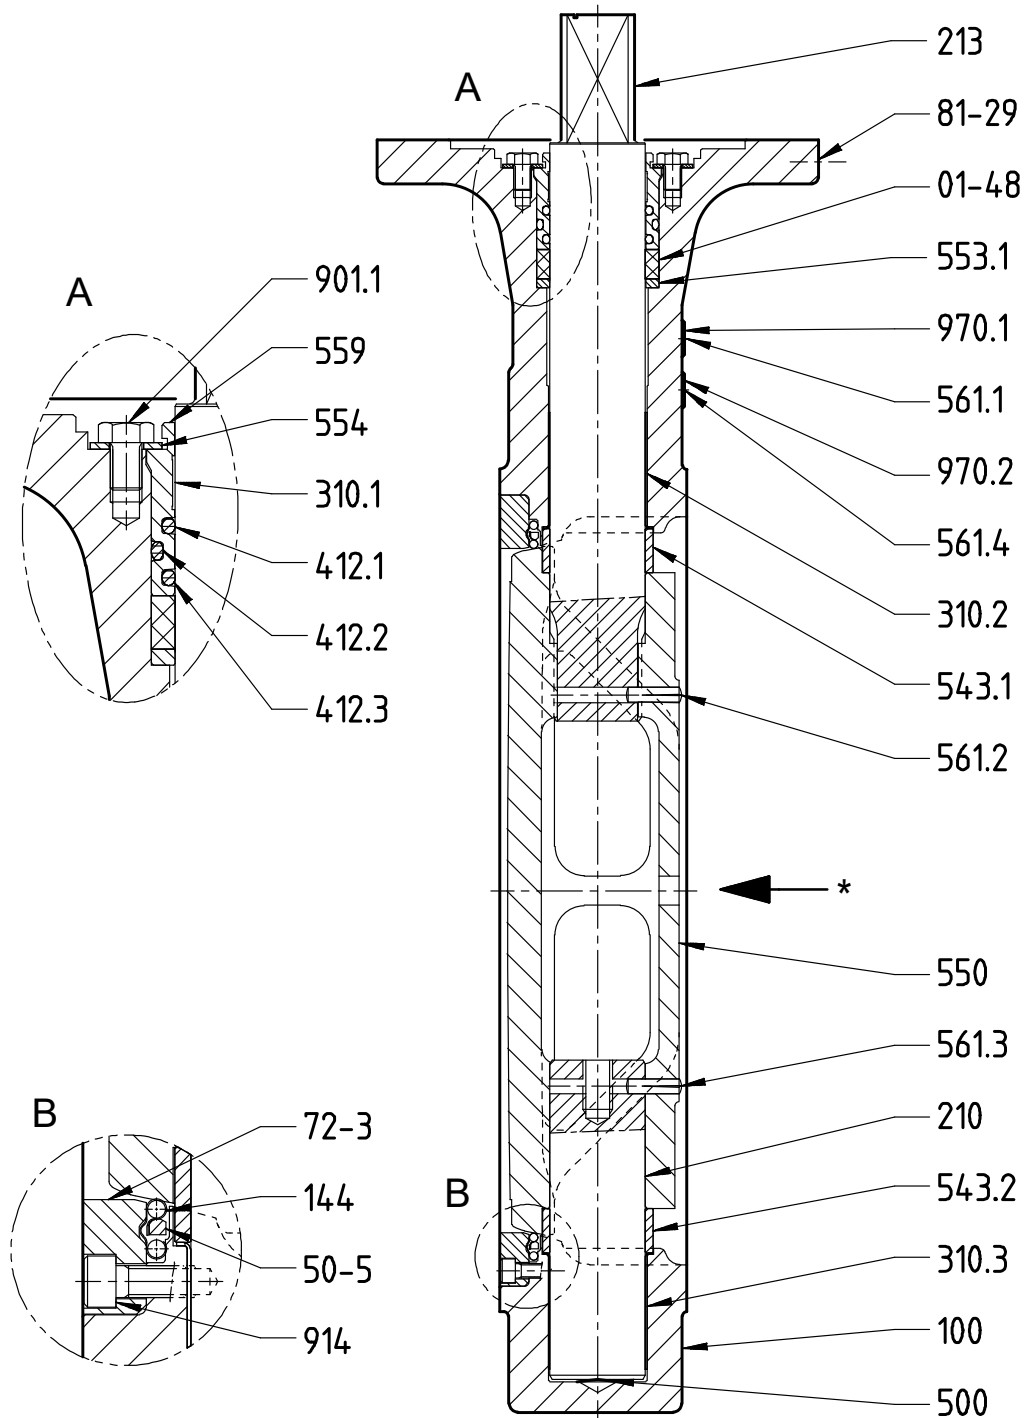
Sectional drawing of TRIODIS 150 MT T4 - DN 300-600 (12-24 inch)
